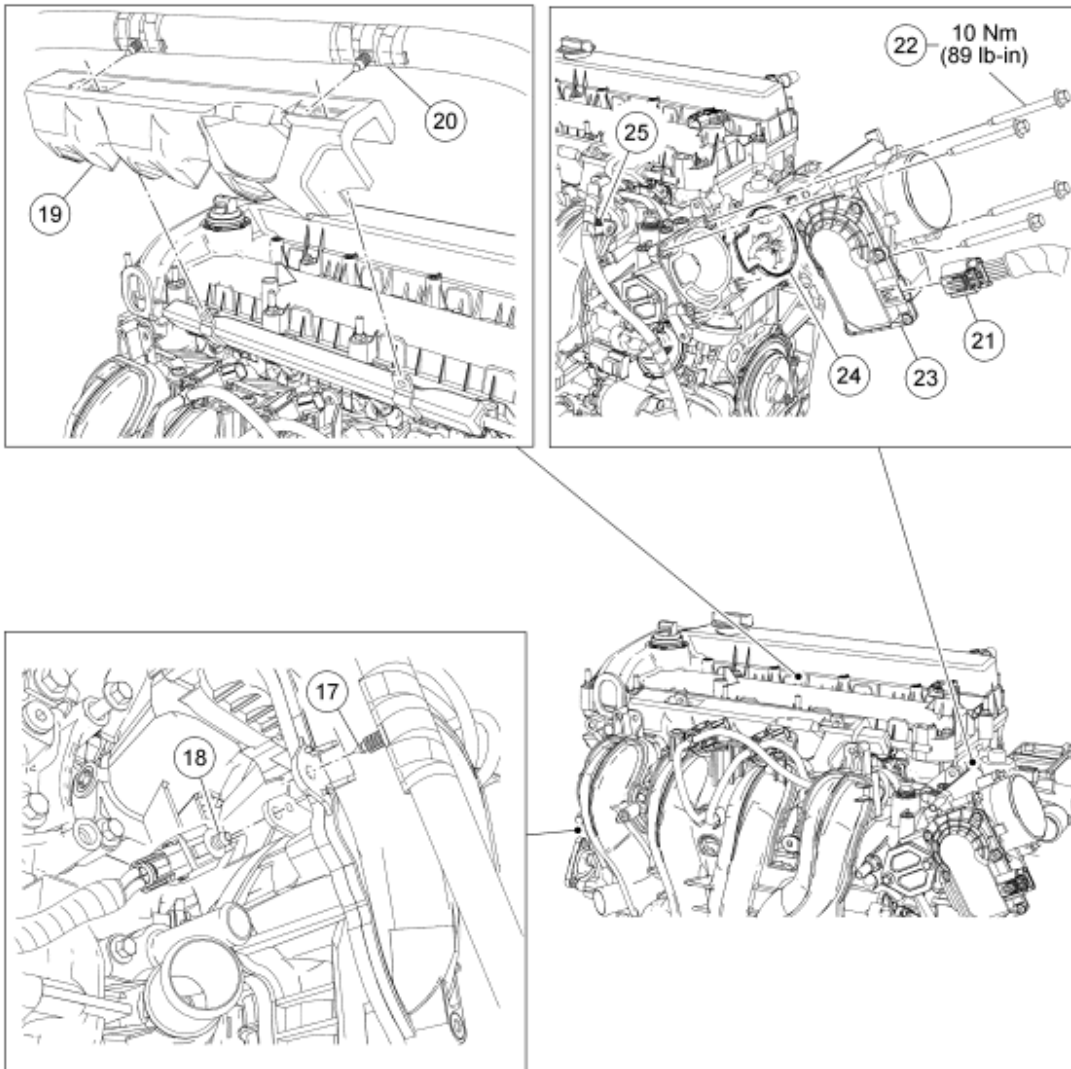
Exploded View Of Intake Manifold (2 Of 4)
